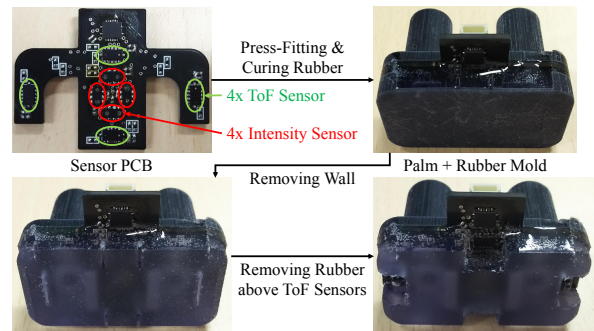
Manufacturing process of the palm. The palm had a PCB with four intensity sensors and four ToF sensors. The PCB was press-fitted to the palm, which additionally serves as a rubber mold. After rubber curing and mold wall removal, the rubber region above each ToF sensor was removed such that the sensor can precisely measure the distance.
